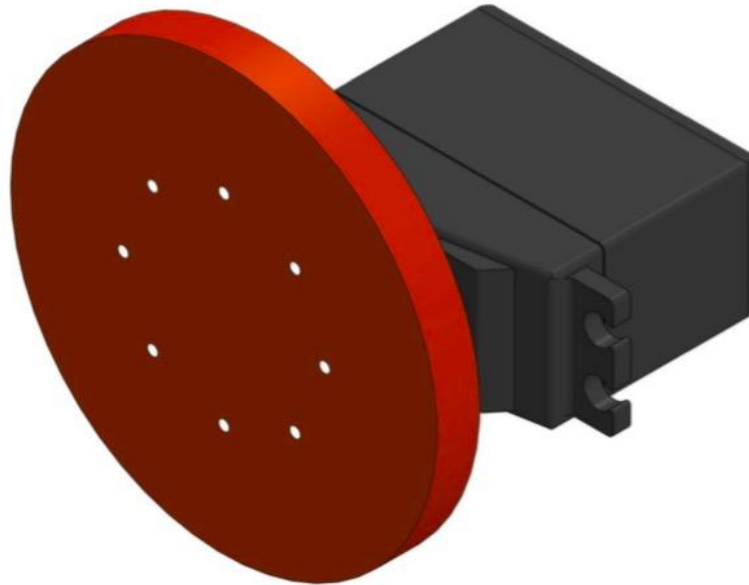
SolidWorks assembly of the robot's fuel crank mechanism.
